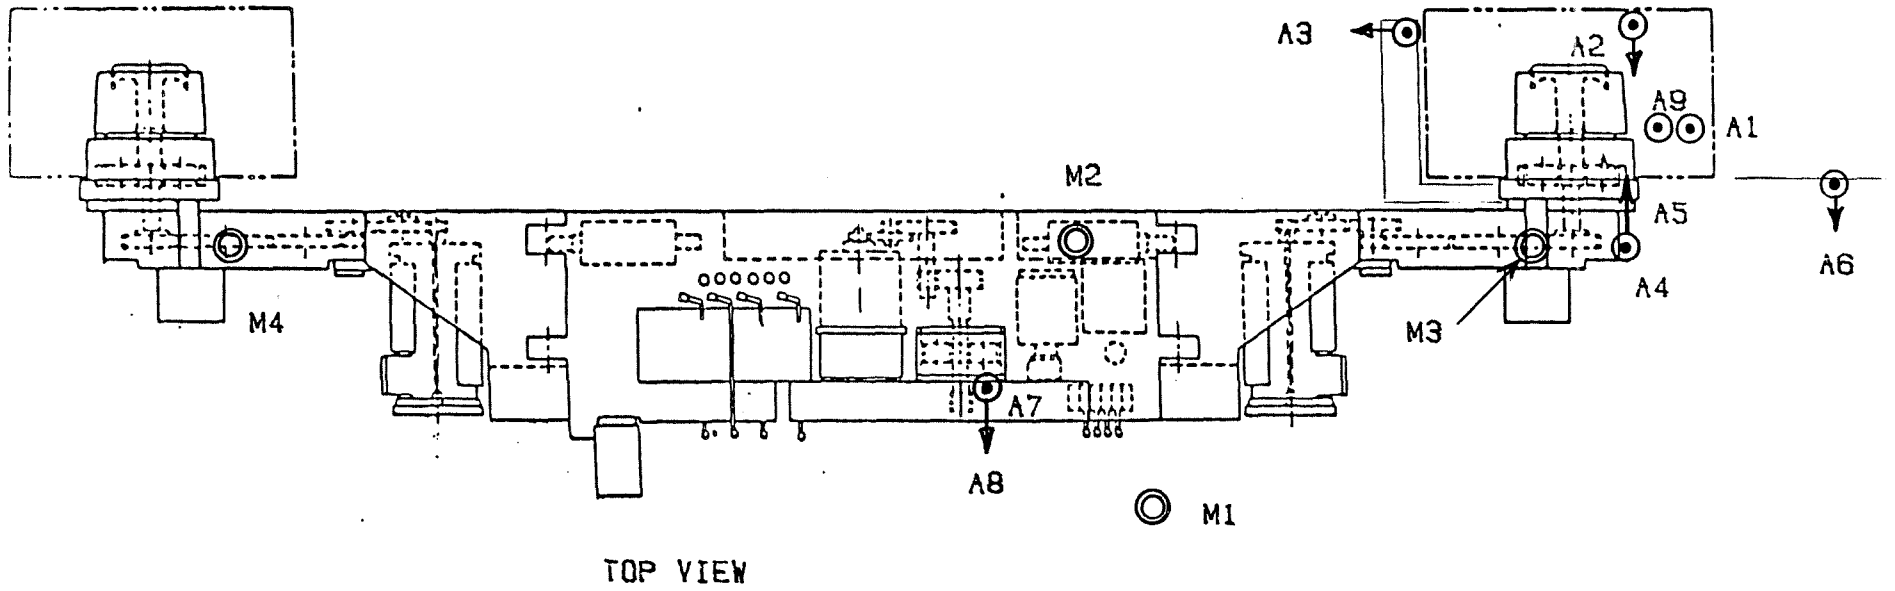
Acoustic measurements near the hydraulic pump of a shearing machine during simulated coal cutting operations
